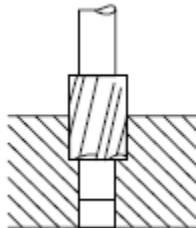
shows the boring operation where enlarging a hole by means of adjustable cutting tools with only one cutting edge is accomplished. A boring tool is employed for this purpose.
